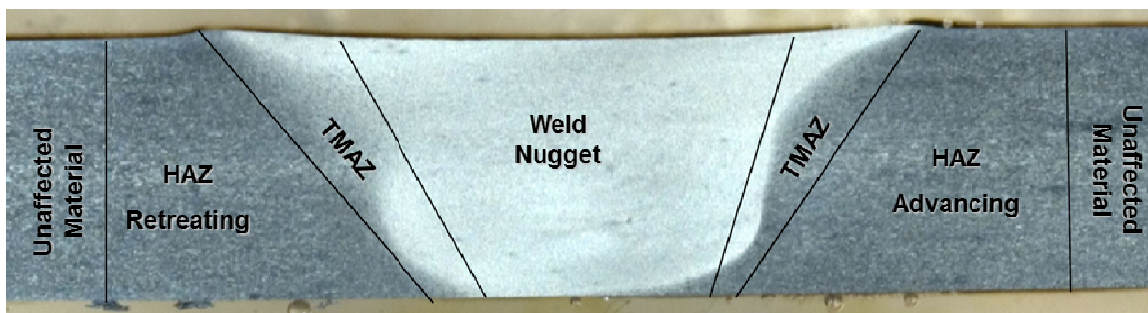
Typical friction stir weld nugget indicating weld zones (shown in aluminum).
